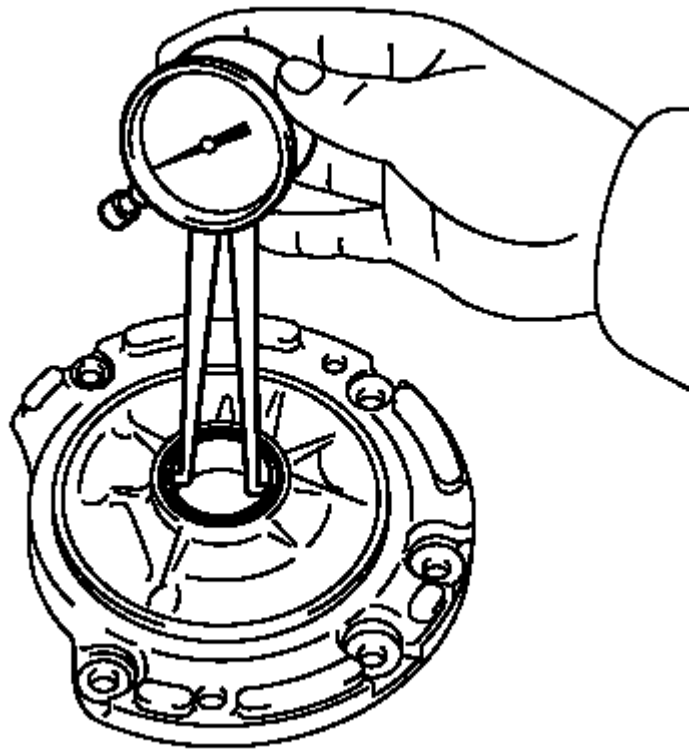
Measuring Inside Diameter Of Oil Pump Bushing
